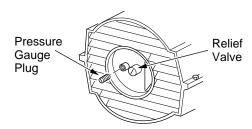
Pressure Gauge Plug Removal (40/55T/70T Models Shown)
